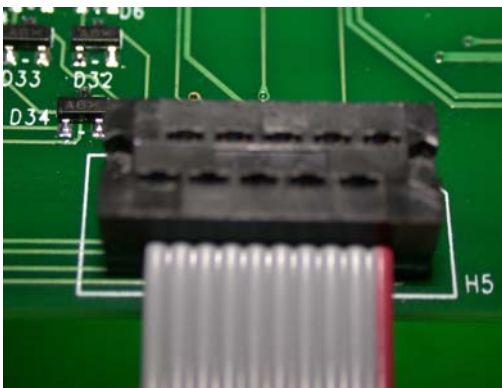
Staked part of cable (P/N 21-30-0034-1) is soldered to H5 on Main PCB.
